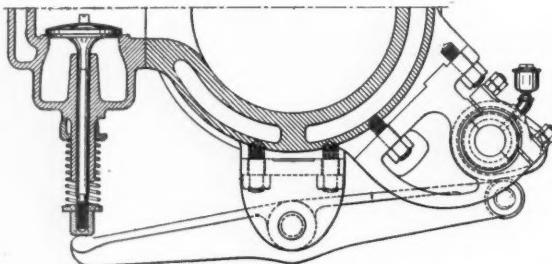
Exhaust Valve and Actuating Mechanism.
